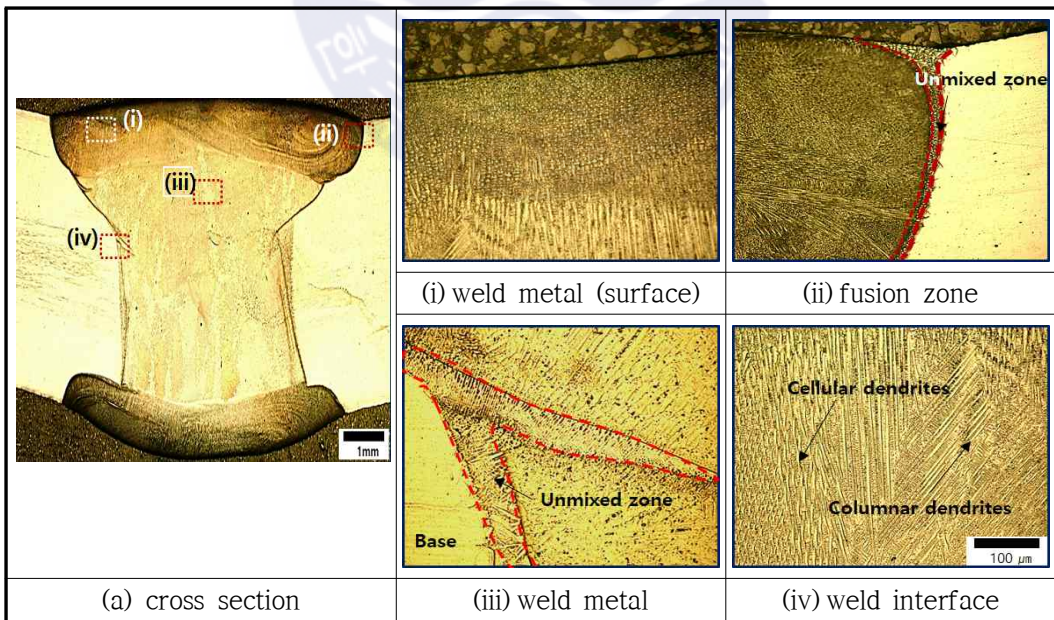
Micrographs of weld joints produced by ERNiCrMo-4 filler metal
